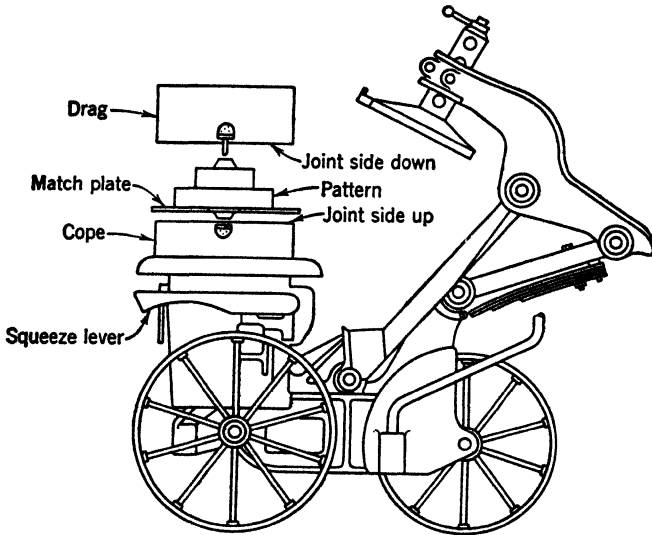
A. Cope, match plate, and drag being assembled in preparation for making a mold. (Reproduced from print belonging to Osborn Manufacturing Co., Cleveland, Ohio.)
